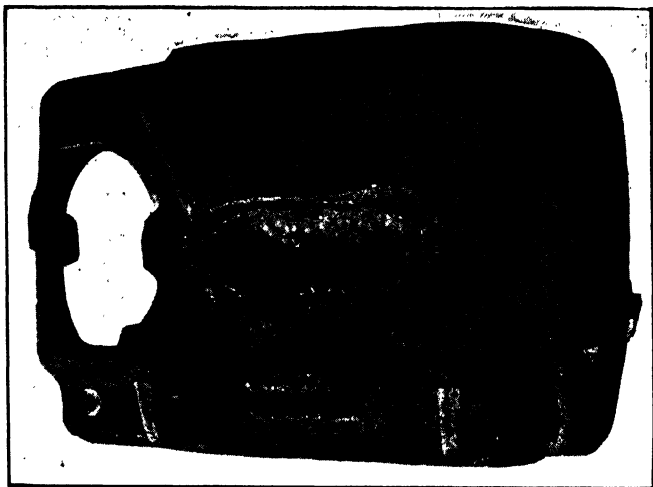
DEFECTIVE STEEL ELECTRIC MOTOR CASTING.
